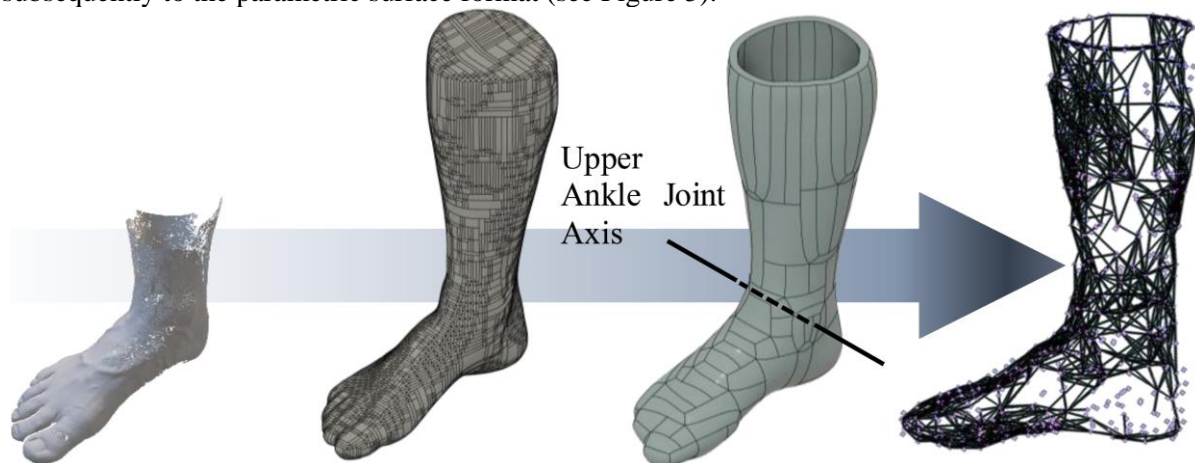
Workflow for the preparation of a B-Rep beam truss construction space of ankle joint orthoses.
